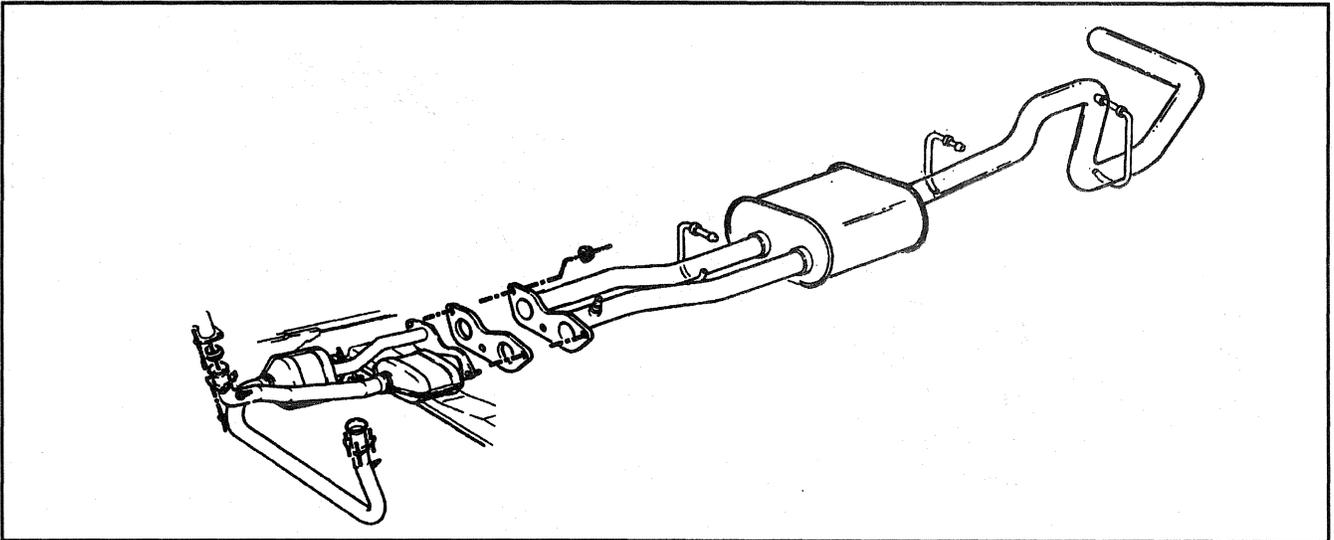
Exhaust System - C/K 1 and 2 Regular Cab w/5.7L Engine under 8,600 GVW
